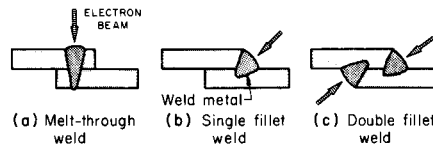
Typical welds obtained by electron beam welding of lap joints
